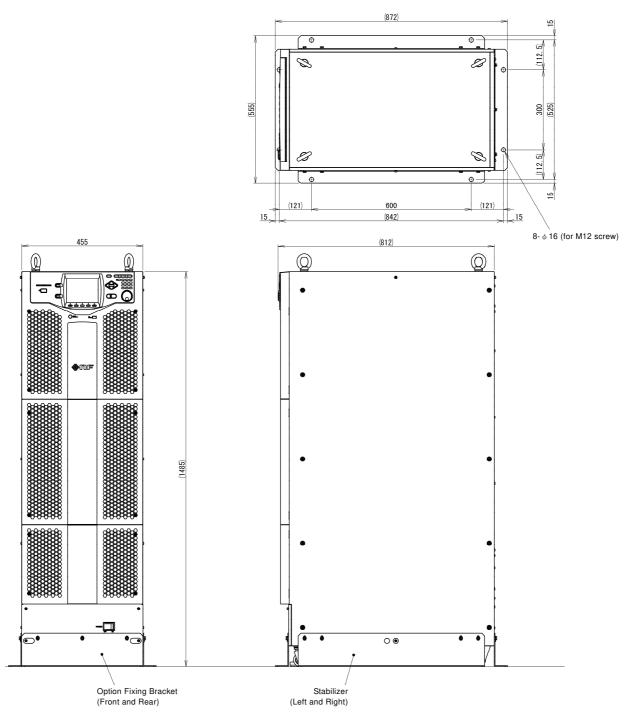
DP160LS Outline Dimensional Drawing when using Fixing Bracket for 1 Unit (Type 4L cabinet)
